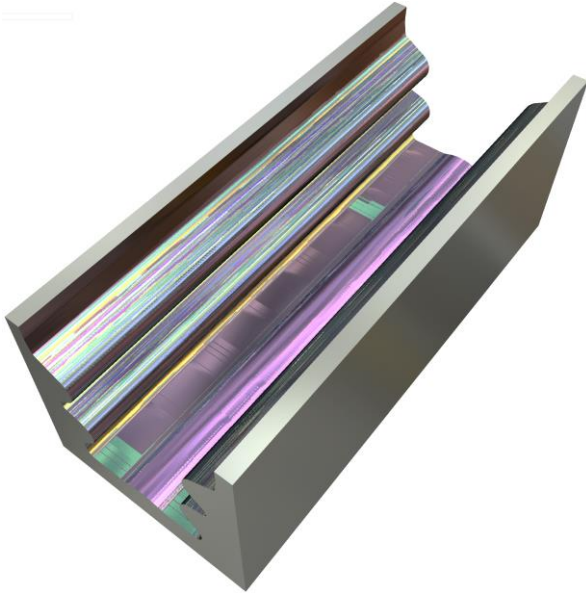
Workpiece after broaching, with reflection effects and colored by engaged tooth.
